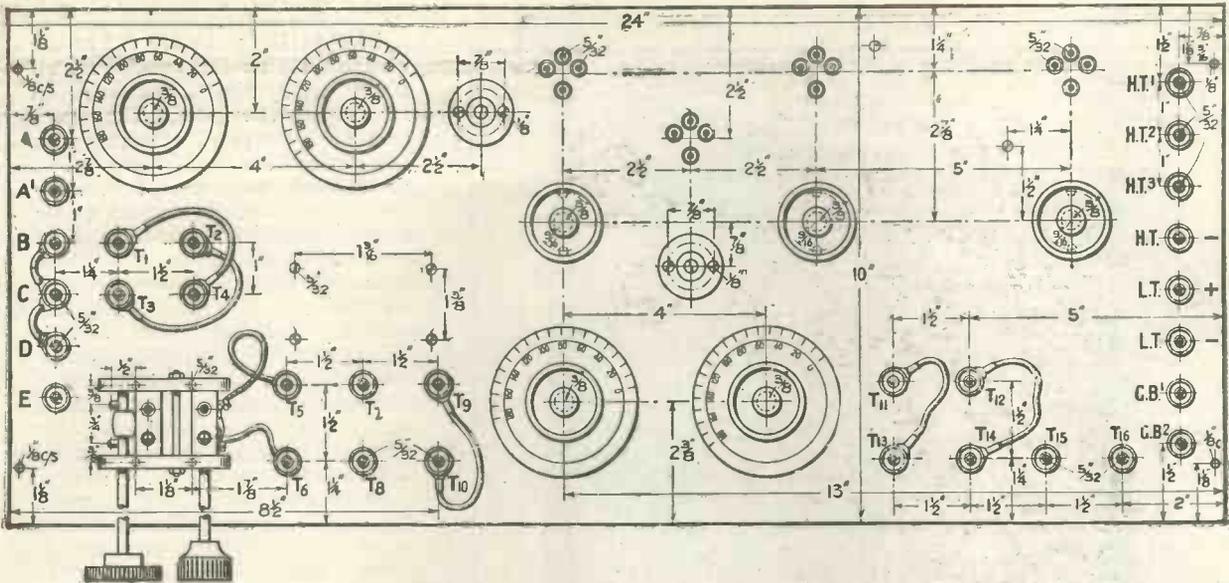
A view of the front of the panel, with all the necessary dimensions for drilling the holes.
